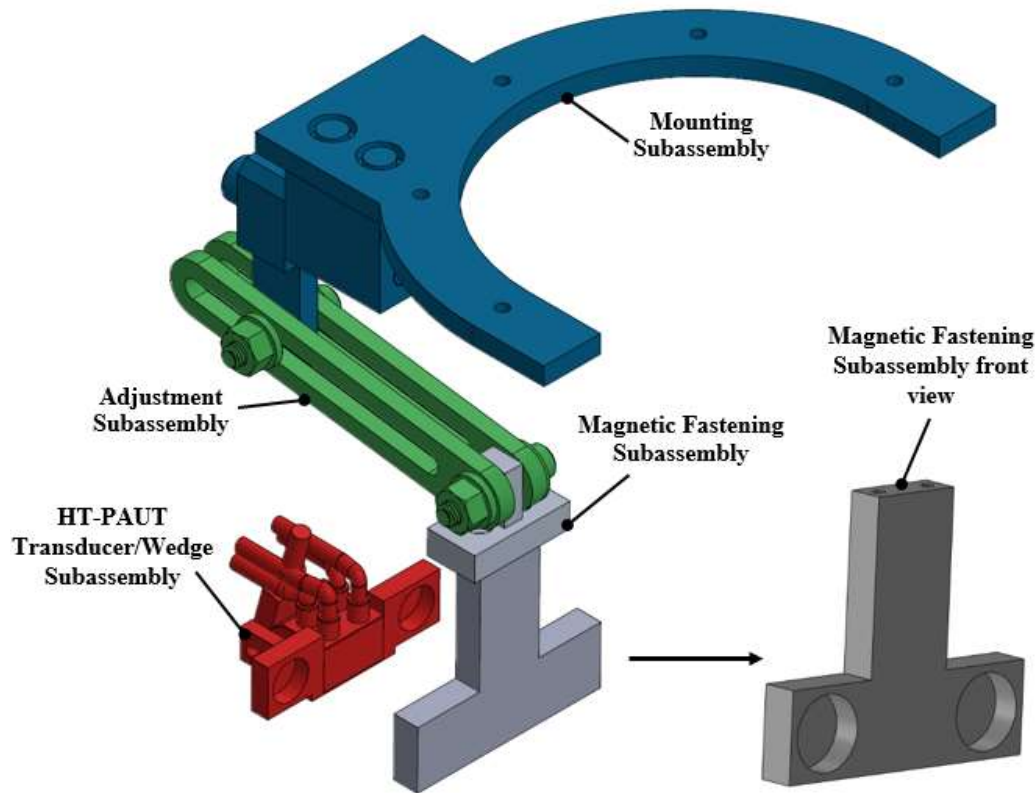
OLSS-2 design illustrating the 4 subassemblies of the system. The hole cut-outs in the magnetic fastening and HT-PAUT transducer/wedge subassemblies illustrate the locations where HT magnetics are placed, which will act as the mechanism to move the wedge with the friction stir welder.
